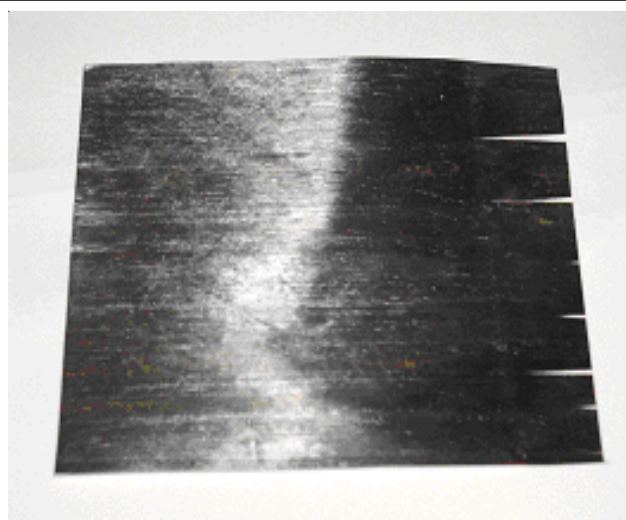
Preparing to build the part by stacking layers. Carbon fiber "uni" tape cut from a spool.
